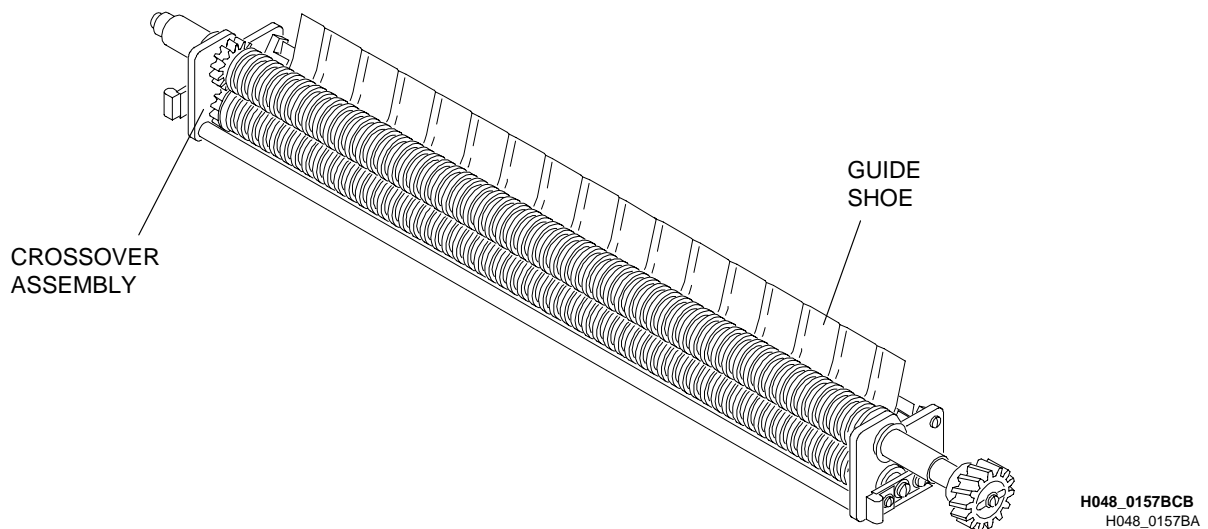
Adjusting the Side Plates of the Detector Crossover Assembly
